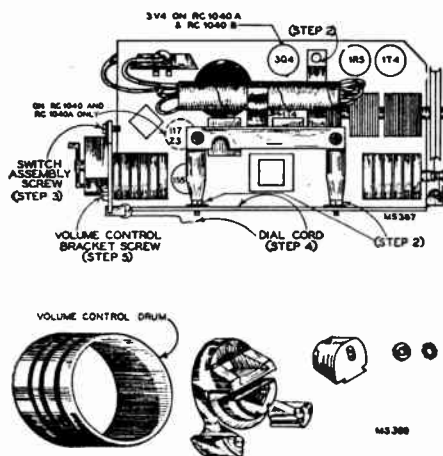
, above. Parts layout of RCA chassis RC-1040B. Fig. 3, left. Volume control disassembly.
